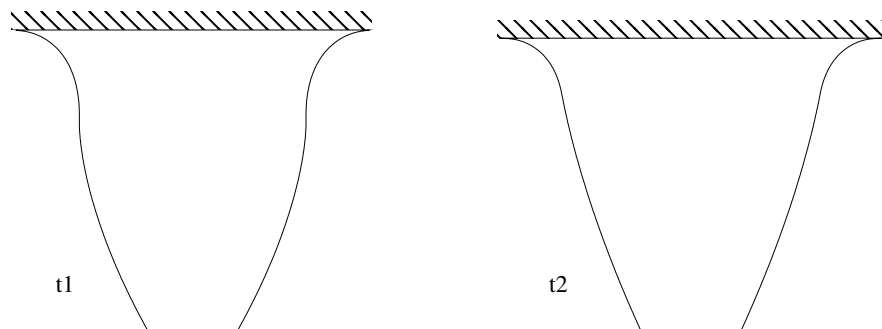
Single tooth clamped at the root for two different size gears ($M = 4\text{mm}$). a) 21 teeth gear. b) 49 teeth gear.
